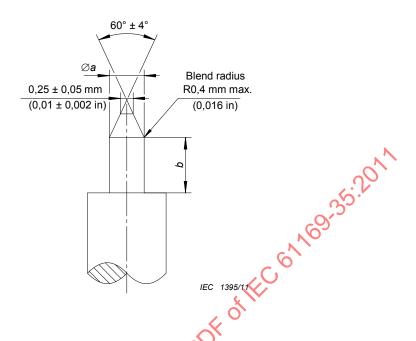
Gauge pins for socket-centre contact (for dimensions and notes, see Table 3)
